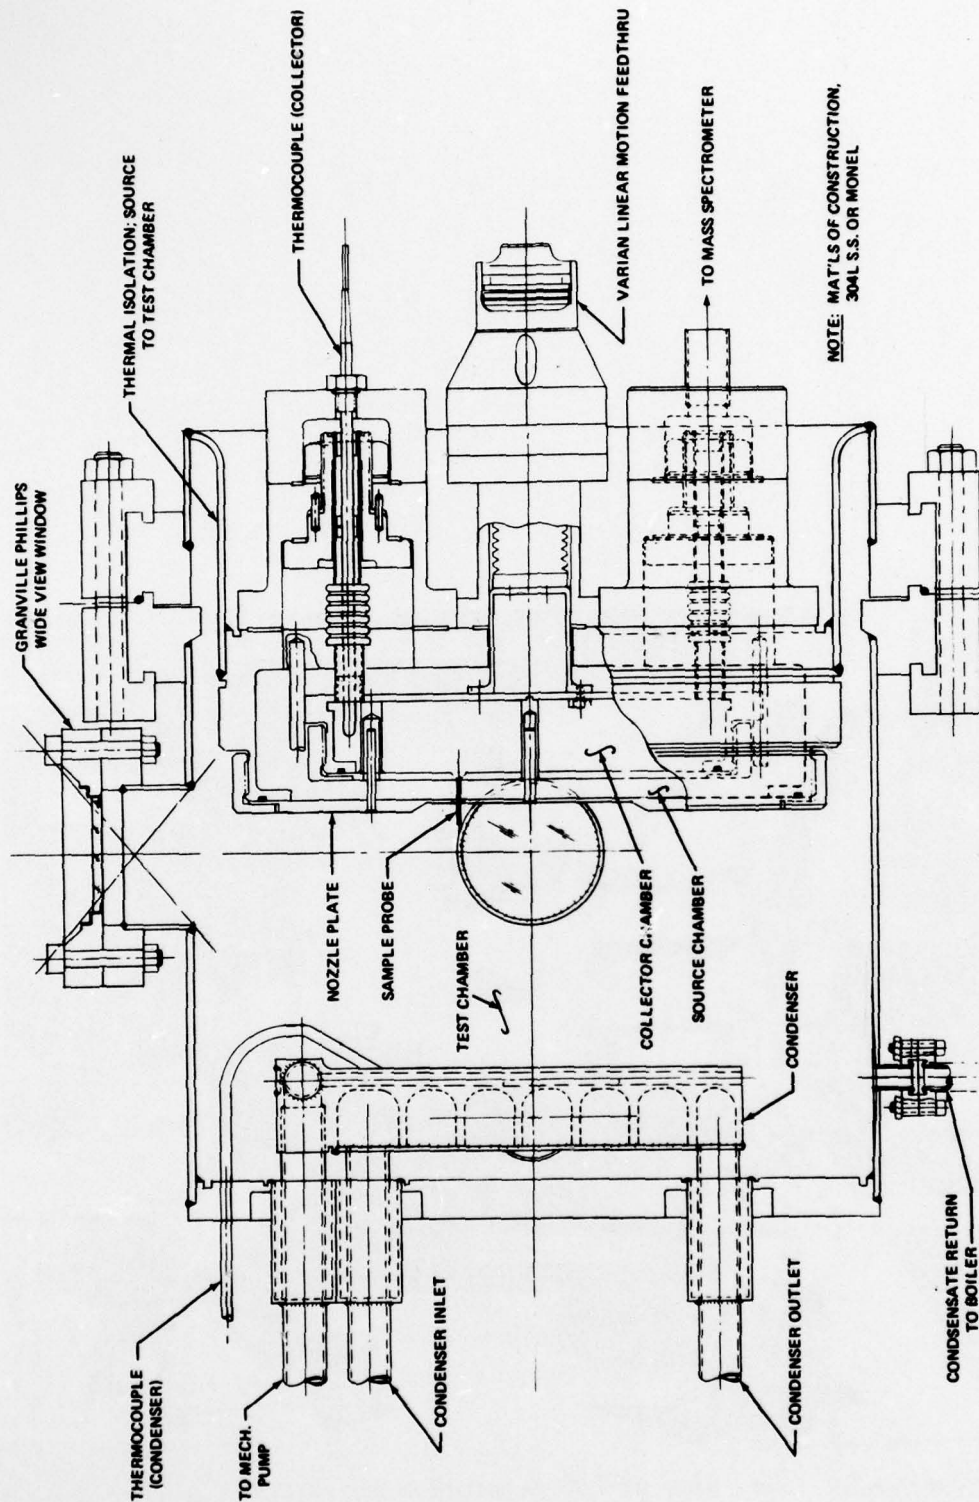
Cross Sectional View of UF₆ Separation Apparatus
